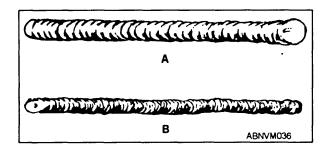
Comparative GTA weld beads with filler rod manipulation.
